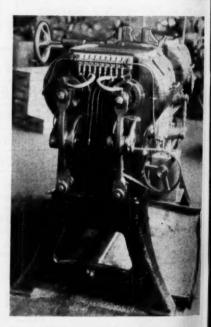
Blanchard Pulsolator in operation a Warner & Swasey chucking machine.
